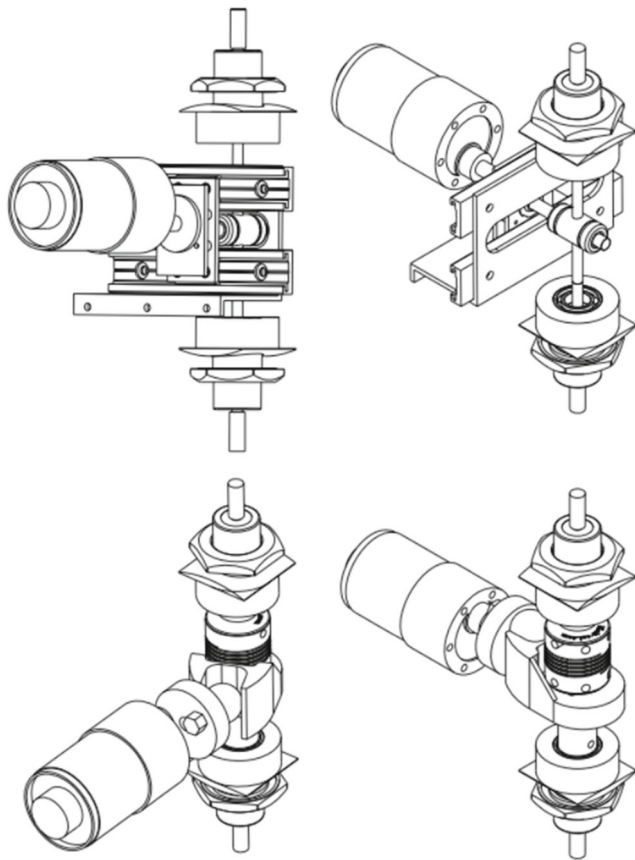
Scotch-Yoke mechanism (upper drawings) and cam-like mechanism (lower drawings) CAD assemblies
